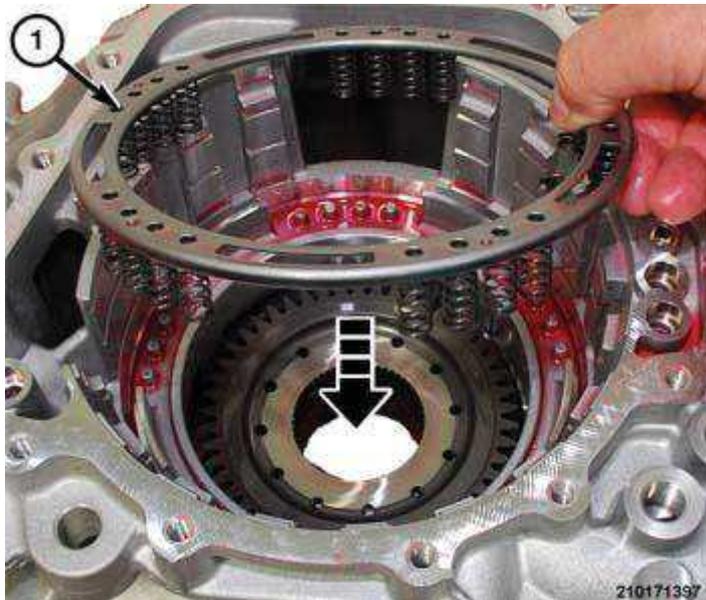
Low/Reverse Brake Piston Spring Retainer
